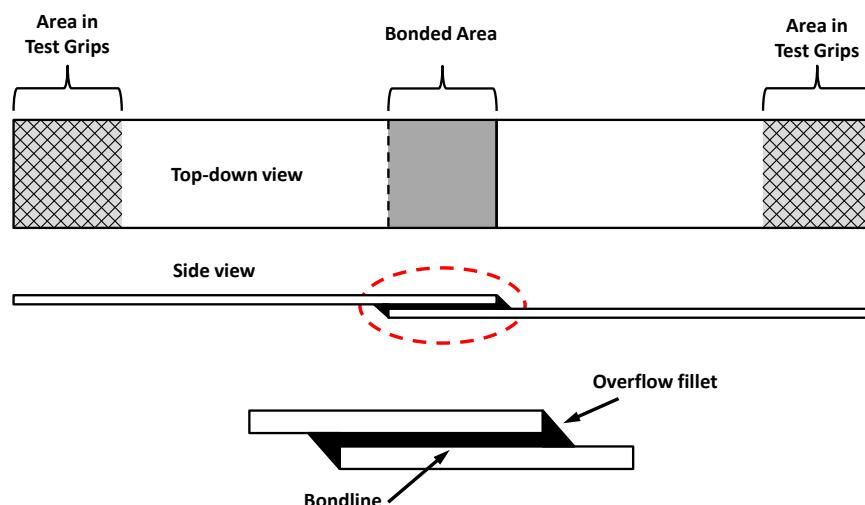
Adhesively bonded single-lap-joint test specimen configuration (refer to ASTM D1002-10 for dimensions)
